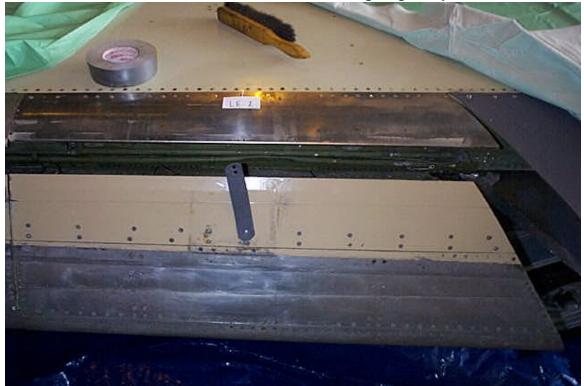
Bracket Used to Secure Leading Edge Flap
